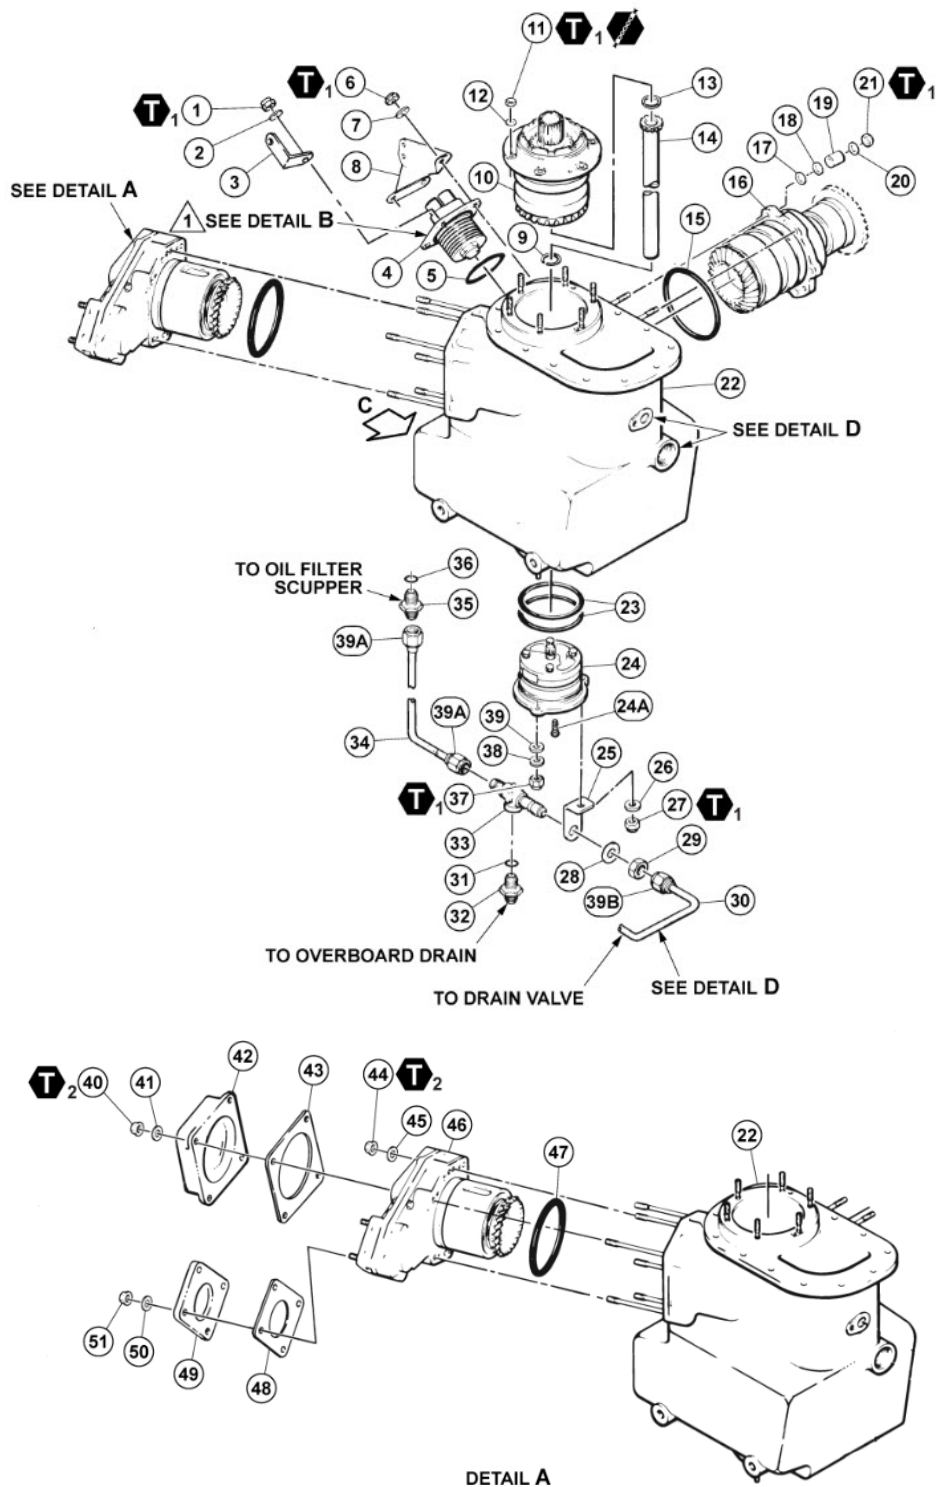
Accessory and Tail Rotor Drive and Sump Assembly. (Sheet 1)
